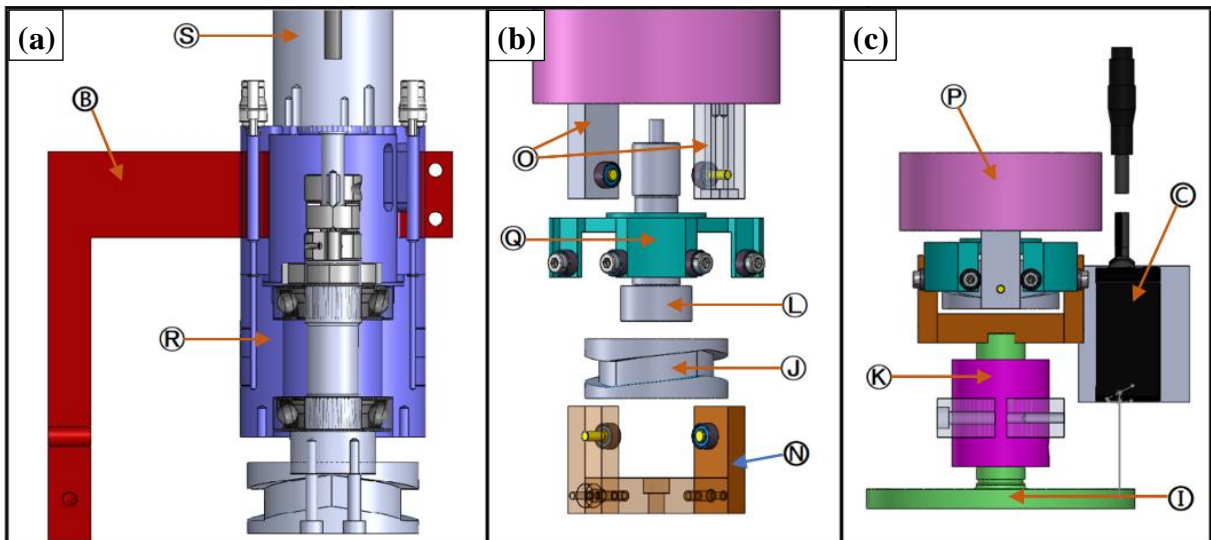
(a) Engine assembly section; (b) Motion conversion assembly; (c) Compression plate assembly.
